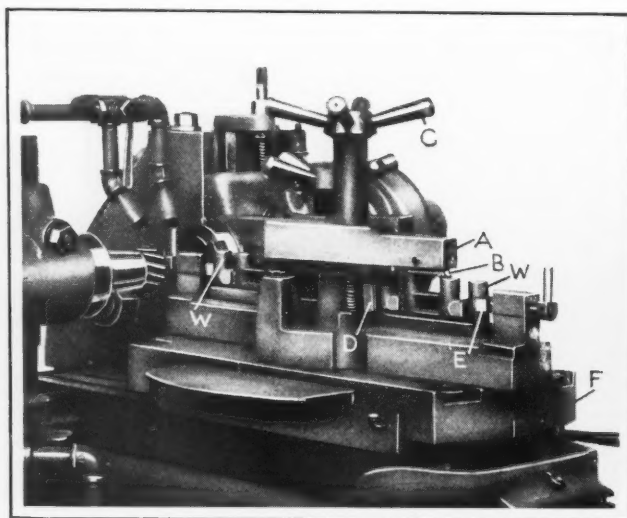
Milling Sides of Valve Lifter Guide Brackets
